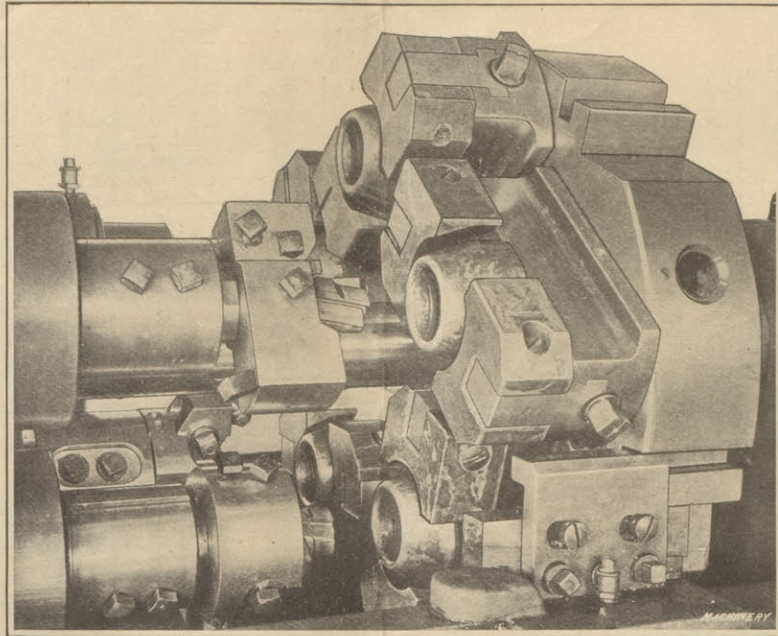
Machining a Shrapnel Head on the New Britain No. 24 Automatic Chucking Machine
